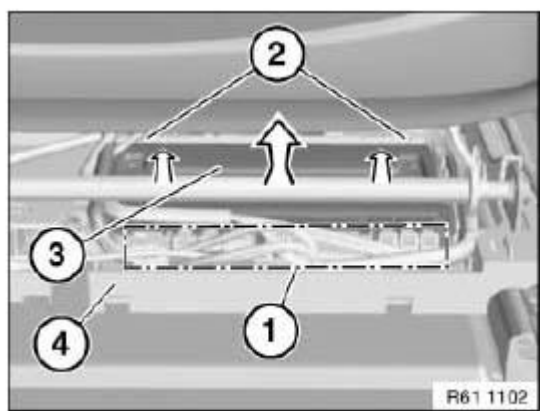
Identifying Control Unit Of Seat Adjustment, Catches And Seat Rail
